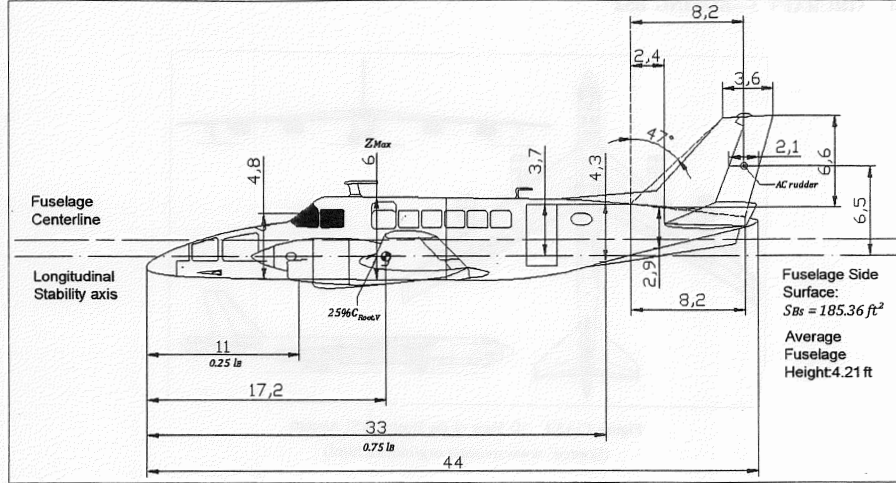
Side CAD View of the Beech 99 Aircraft
